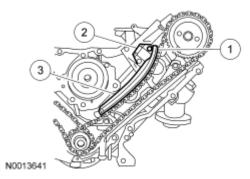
Identifying Timing Chain Tensioning System Courtesy of FORD MOTOR CO.
